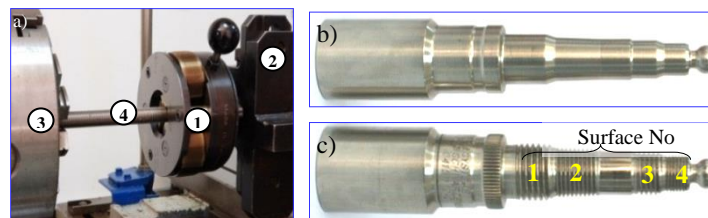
View of working stand for the axial thread rolling method by angle head type F3 (FETTE) (a): 1 – thread rolling head, 2 – head holder, 3 – three-jaw chuck, 4 – rolled rod and exemplary workpiece before (b) and after thread rolling process (c)
